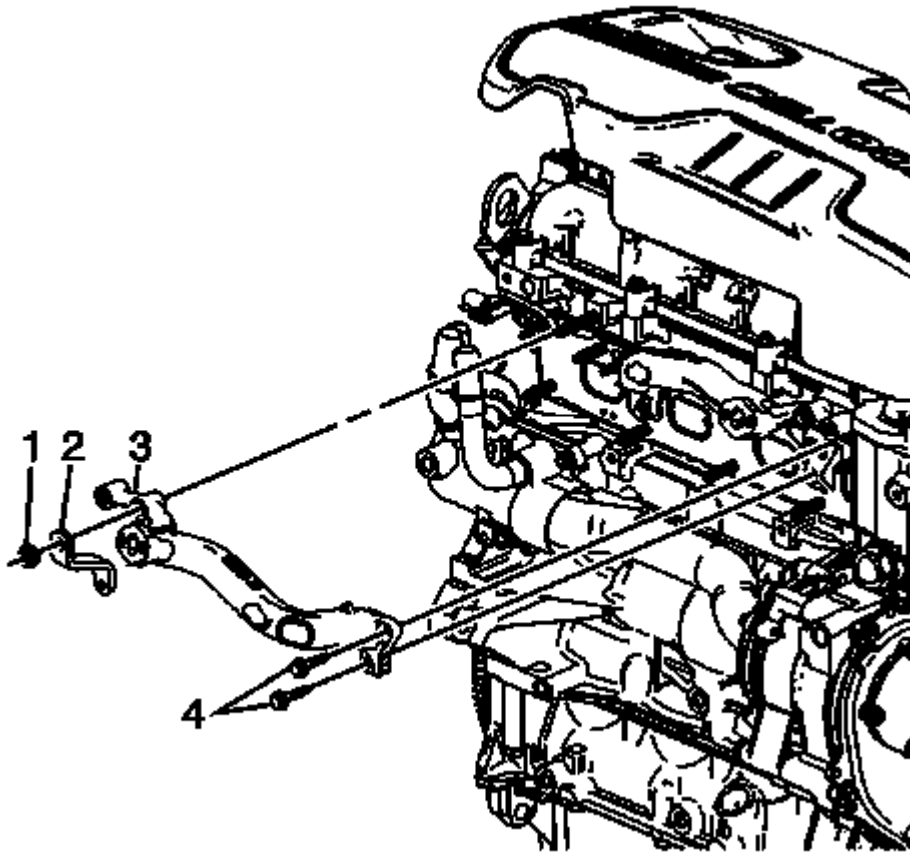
Secondary Air Injection Check Valve Pipe Adapter And Mounting Components
